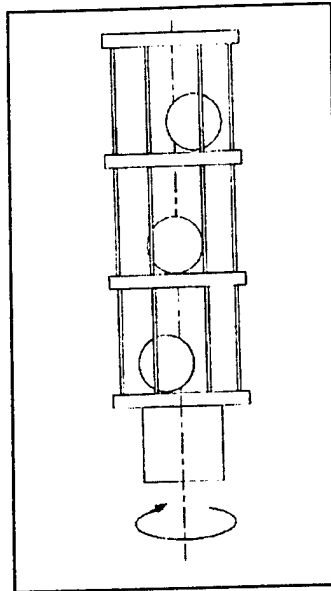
Rotating cage fixture for uniform coating of bearing balls.
